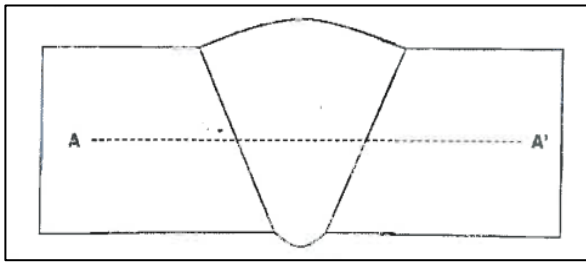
Schematic of weldment cross-section and hardness measurement.
